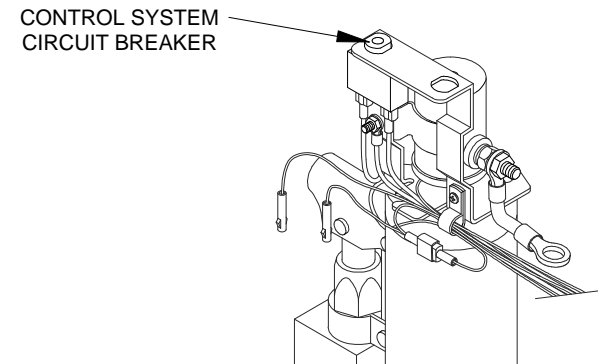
CIRCUIT BREAKER ON PUMP ASSEMBLY
